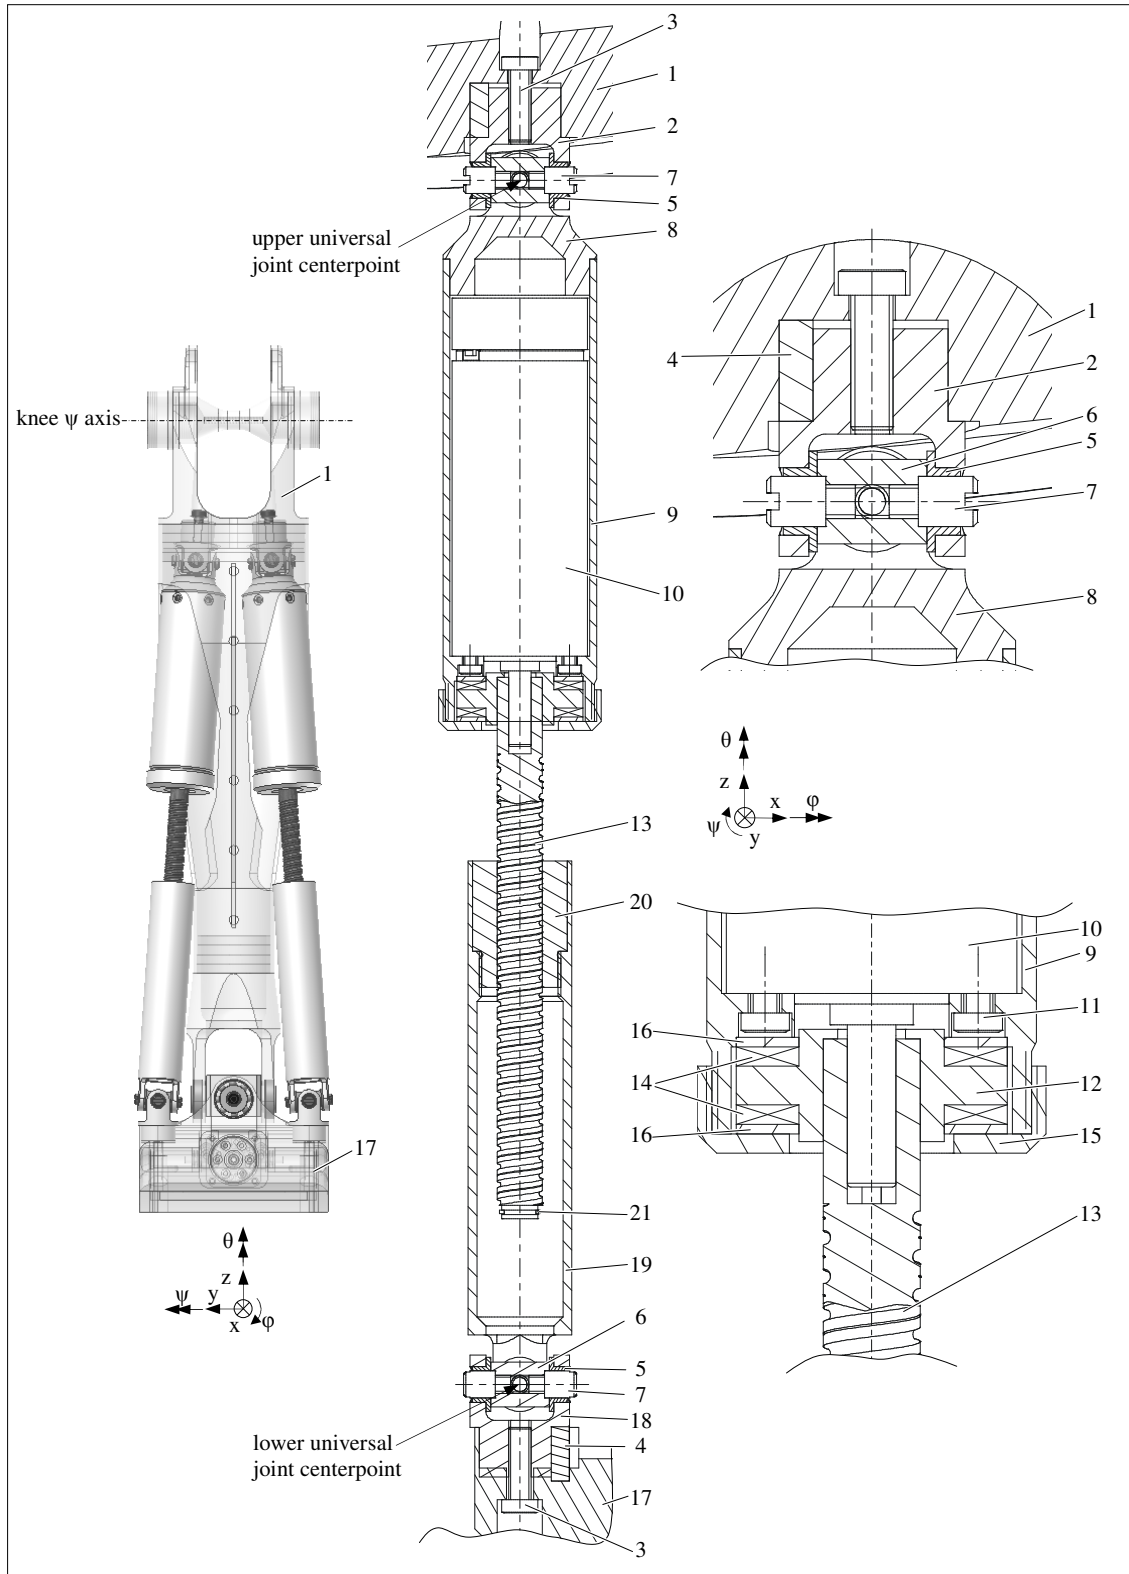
Construction of a ball screw actuator. Posterior view with all components, except the ball screw actuators, made transparent (left). A ball screw actuator section view (middle) and two details: the upper universal joint (right above) and the motor to spindle assembly (right below): lower leg knee bracket (1), universal joint bracket 1 (2), M5 bolts (3), parallel keys (4), plain bearings (5), intermediate blocks (6), universal joint axles (7), cup flange (8), motor cup (9), DC motor (10), M3 Bolts (11), flange (12), ball screw spindle (13), axial needle roller bearings (14), cover (15), axial bearing washers (16), foot (17), universal joint bracket 2 (18), sleeve (19), ball screw nut (20), retaining ring (21).
